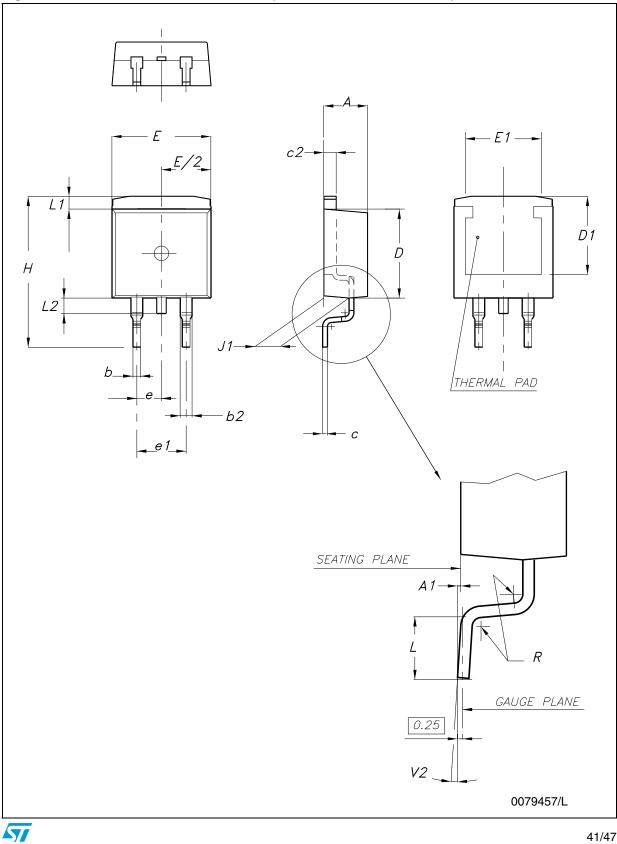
DRAWING DIMENSION D²PAK (TYPE WOOSEOK-SUBCON.)
